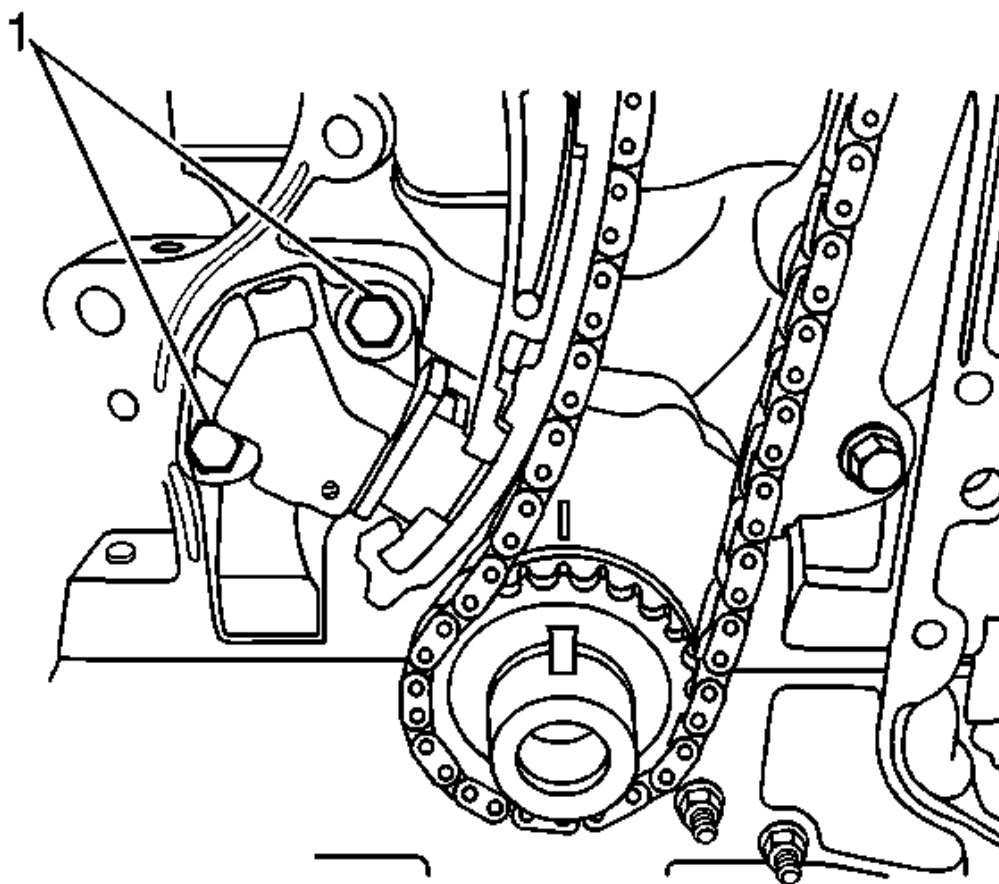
View Of Crankshaft Timing Chain Tensioner Bolts
